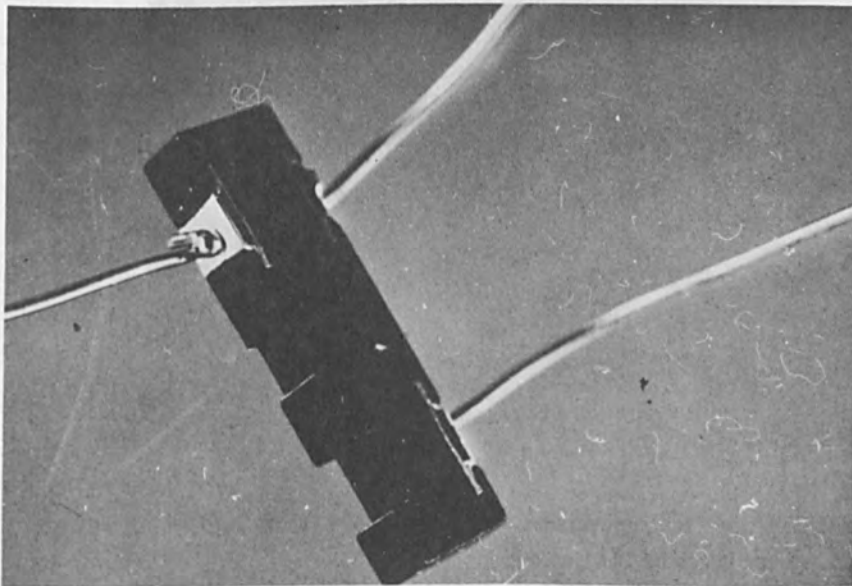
EB welder used to attach small wires to electrical components.
